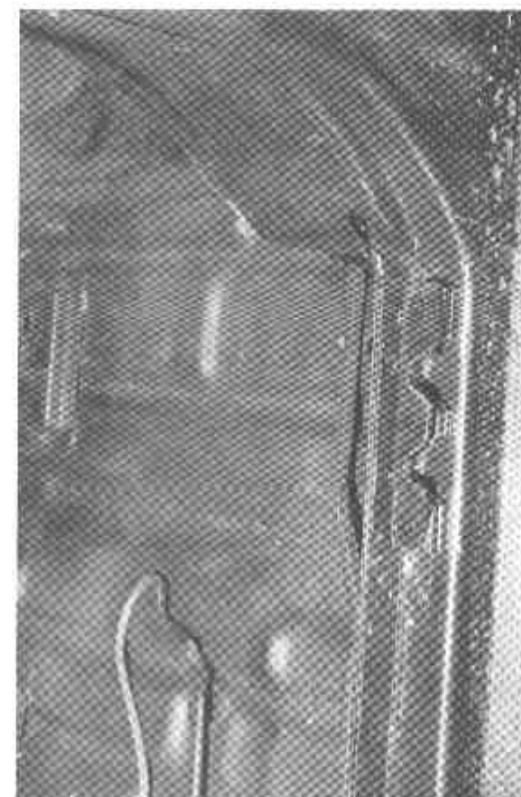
VEHICLE 2 - TEST 7 - VIEWS OF DOOR SILL INTERLOCKS
